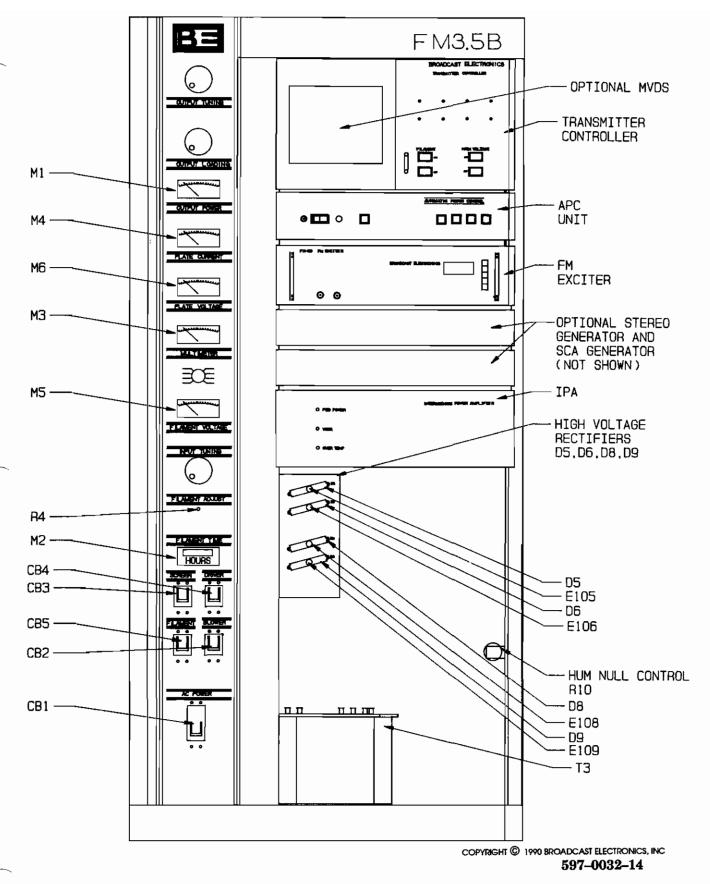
FM-3.5B CABINET COMPONENT LOCATOR, FRONT
